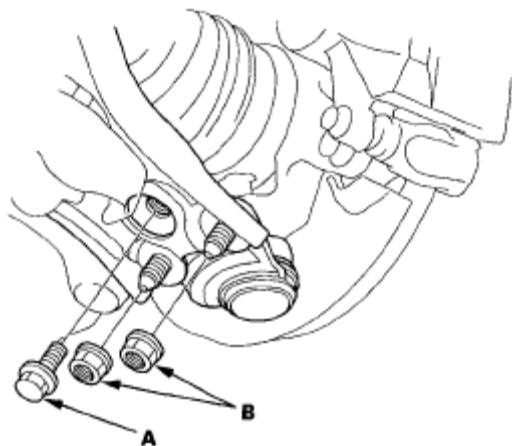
Identifying Lower Ball Joint Mounting Bolt And Flange Nuts
